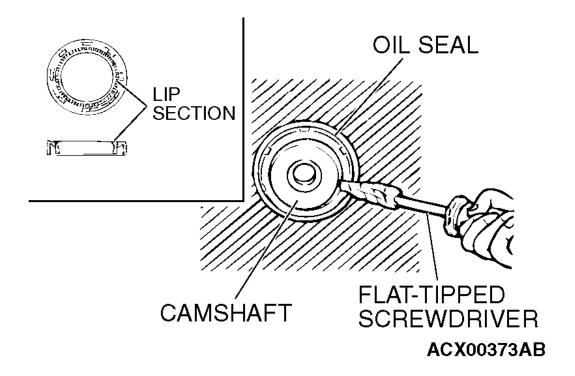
Removing Oil Seal Courtesy of MITSUBISHI MOTOR SALES OF AMERICA.
